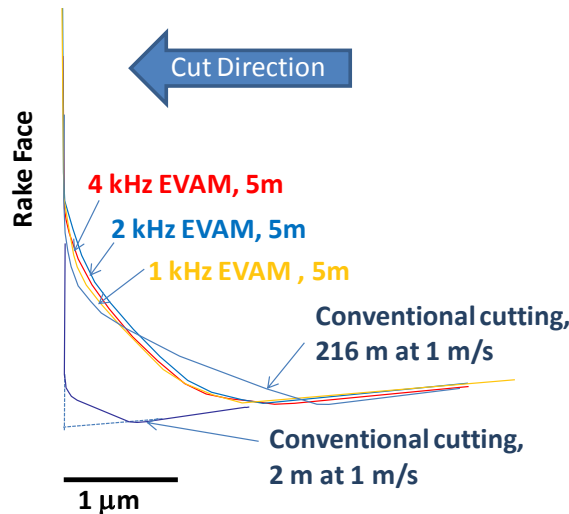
2D worn tool cross sections for EVAM and conventional machining.
